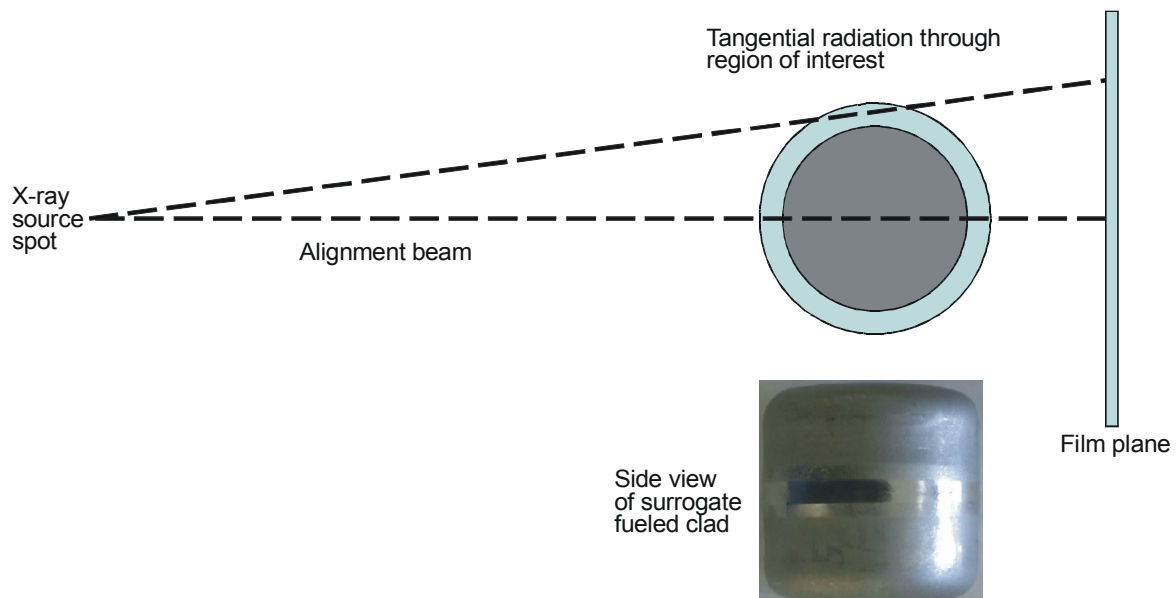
Tangential radiography (top view). The region of interest is the girth weld (bright horizontal strip in the side view of the photograph). The top view indicates the path of the tangential radiation along the weld.
